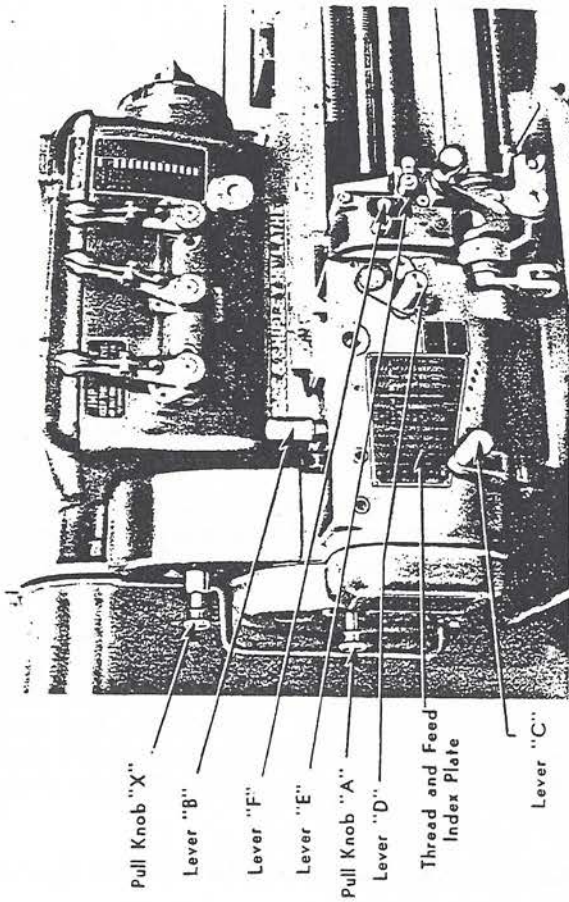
Head End View of Lathe Equipped With Reverse To Leadscrew and Coarse Threading Attachment
